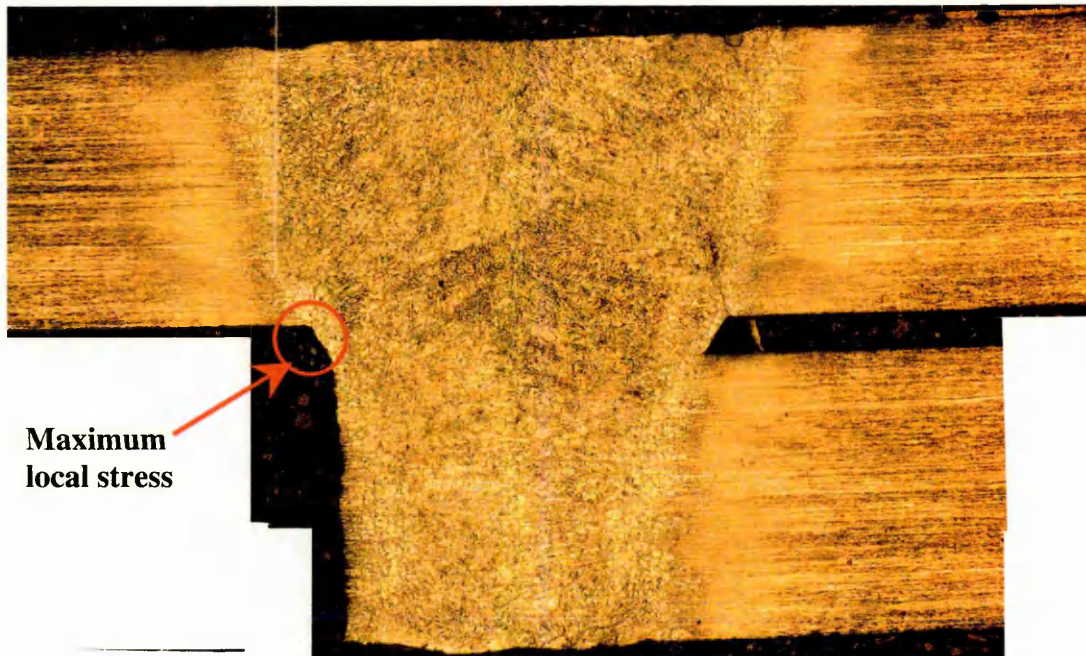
1mm 2101 lap joint fatigue failure with a fatigue crack present at the opposite side of the lap joint
